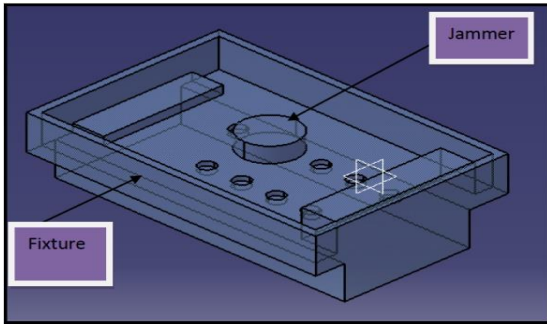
Workpiece holding unit for underwater laser transmission machining [7]
